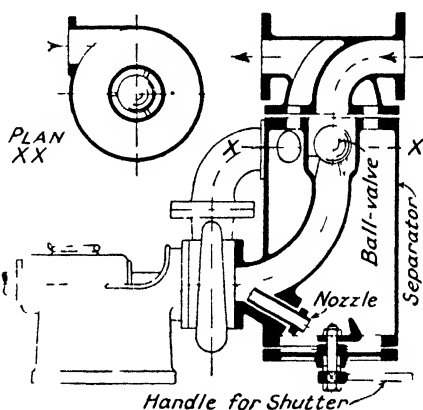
Standard pump fitted with priming nozzle and air separator.
